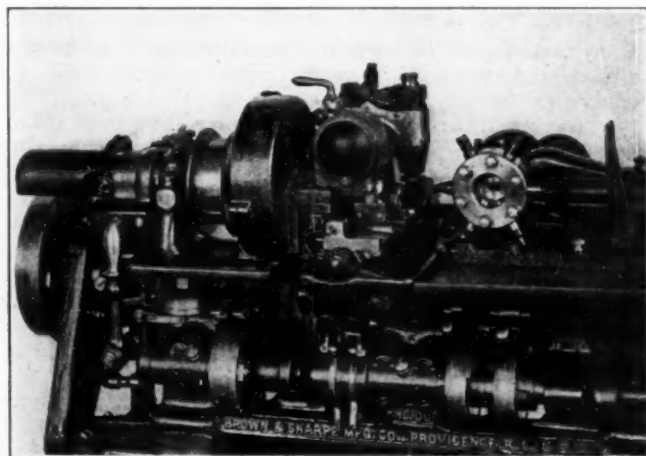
ATTACHMENT FOR CUTTING THE THREADS OF WORMS BY THE HOBGING PROCESS ON B. & S. AUTOMATIC SCREW MACHINES
